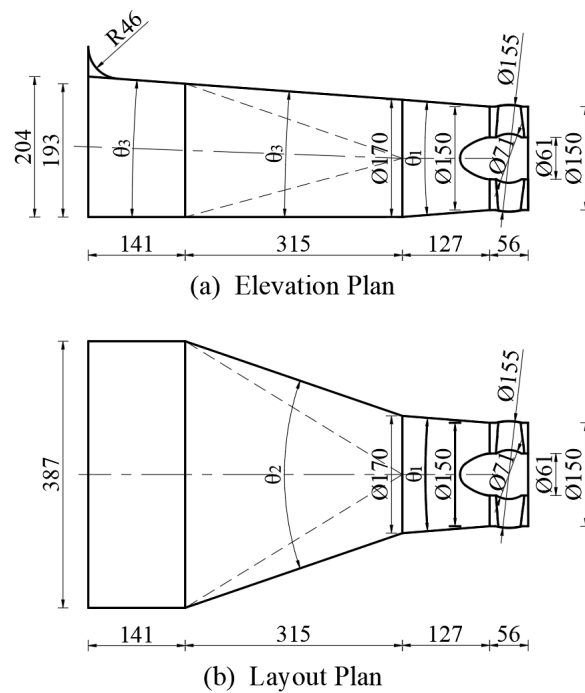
Model dimension of inlet passage and axial pump (unit: mm).
